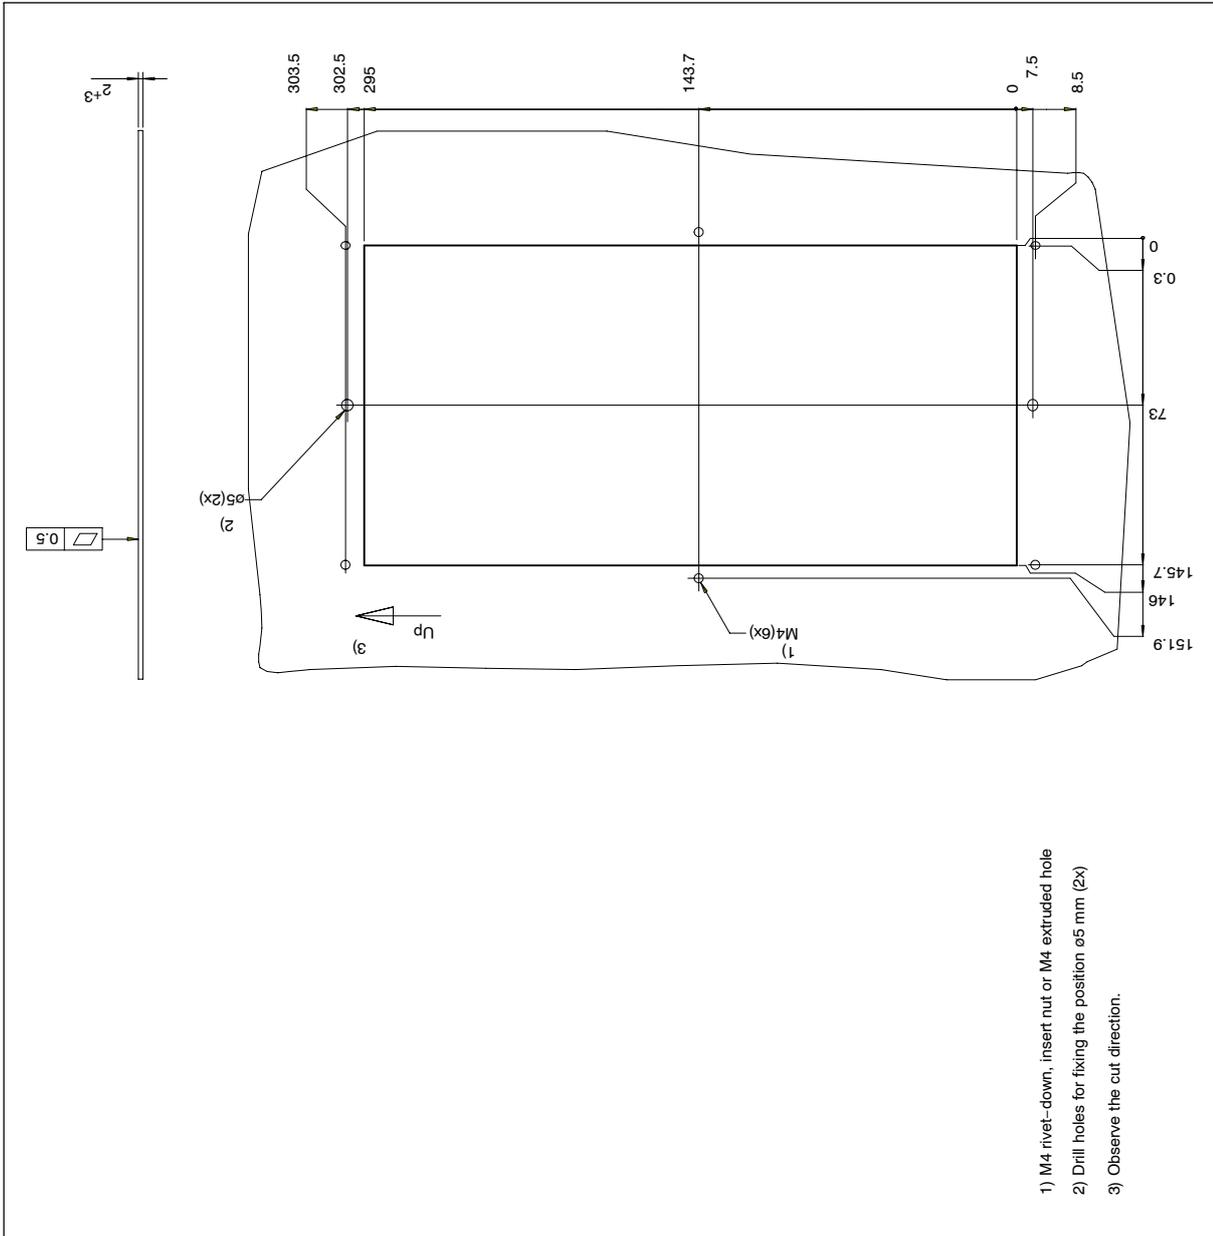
Drilling pattern for the keyboard (vertical layout for installation alongside the PCU)
